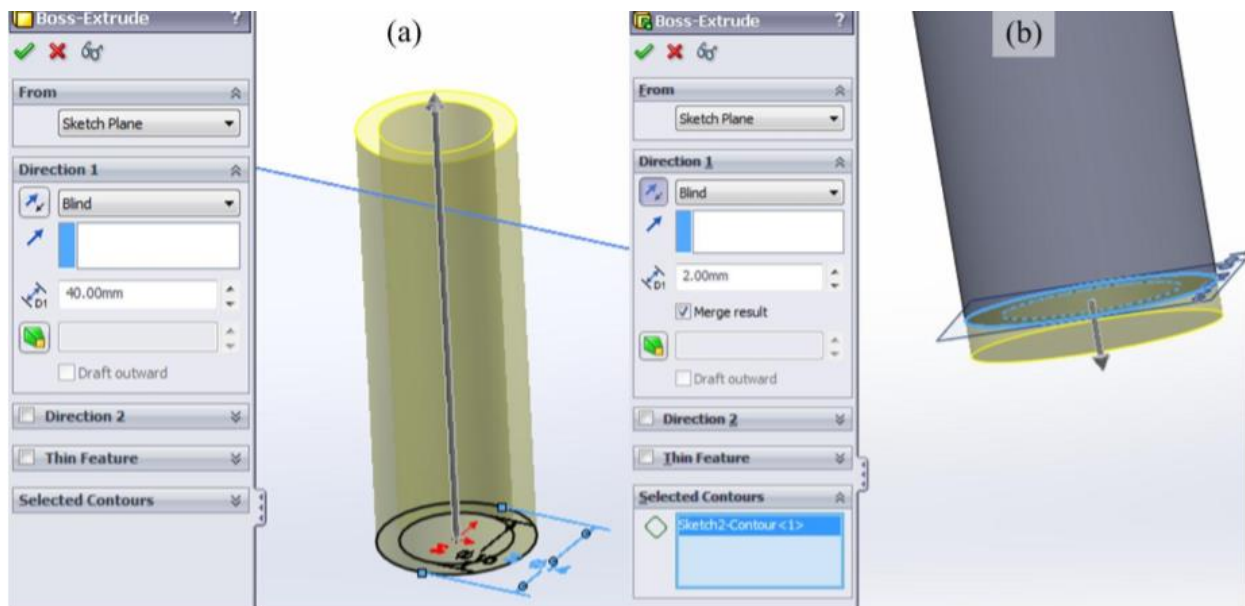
Boss extrude to create (a) the column wall and (b) column cap
